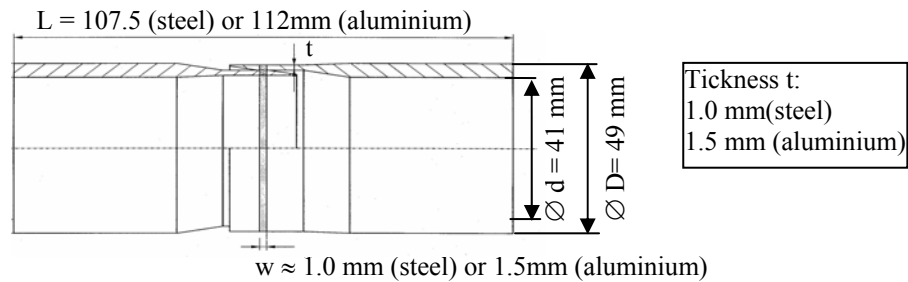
Laser beam welded, overlapped tube-tube specimen
